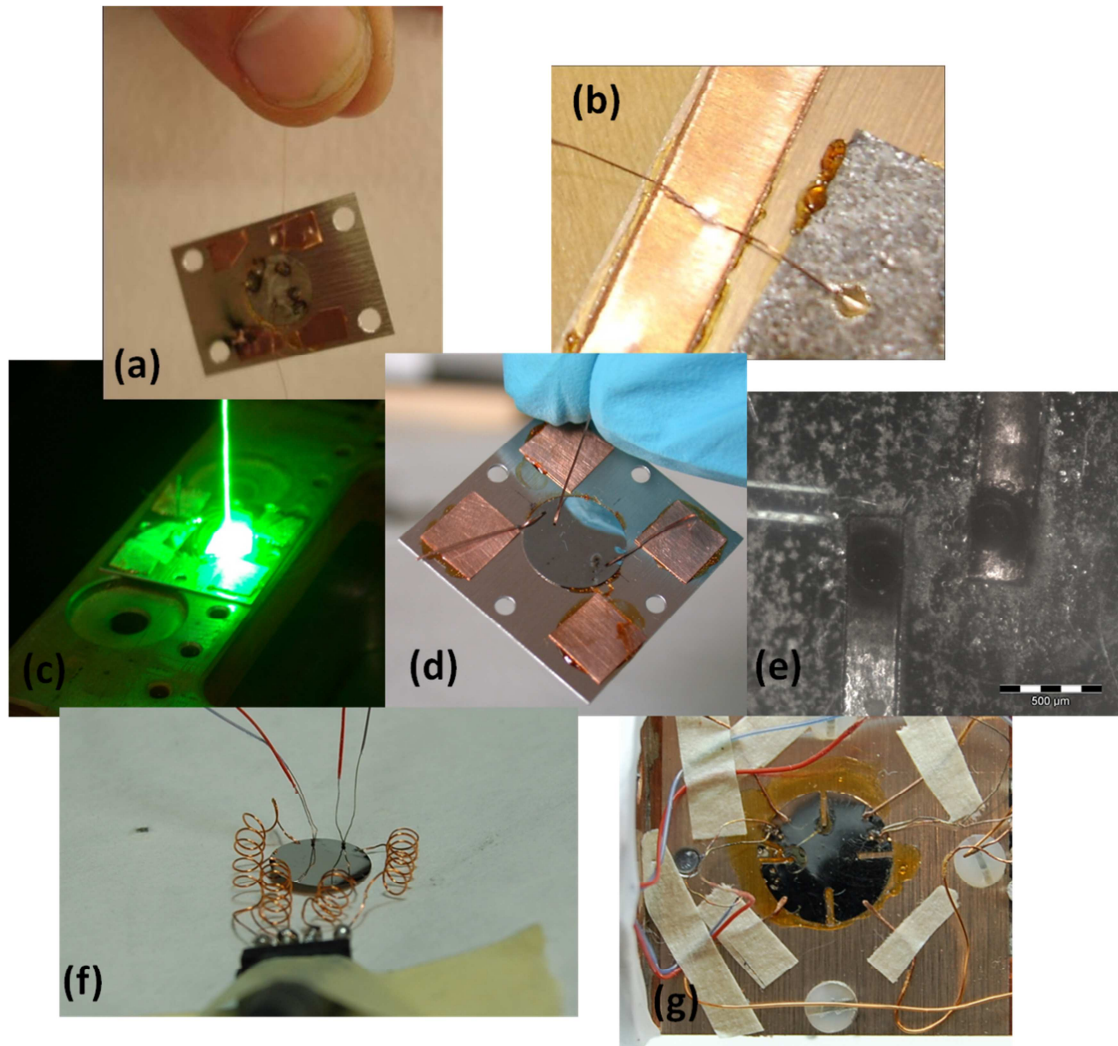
Welding tests: (a) HFRW test showing good mechanical resistance but very harmful for thin samples, (b) detail of (a), (c) laser spot-welding test, (d) good mechanical resistance (c), (e) area of contact of the laser-spot welding, (f) Spot welding test at CIEMAT, cheap, easy, reproducible, this was the chosen welding method, (g) final sample geometry, mirror-like finish after polishing, resistivity probes and thermocouples spot-welded to the sample.
